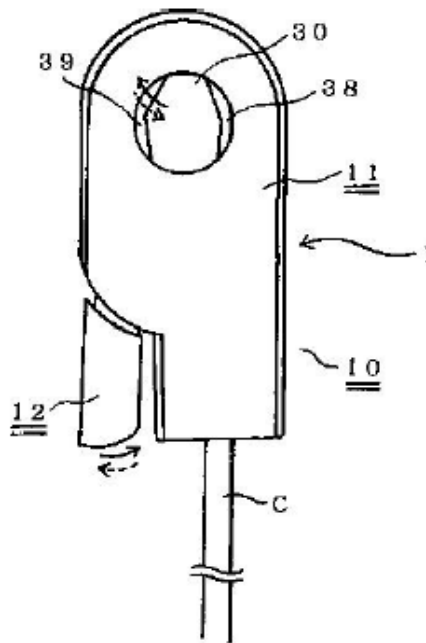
, above, illustrates connecting tool 1 with holding members 38, 39 visible through opening portion 30. *Id.* ¶ 24.
